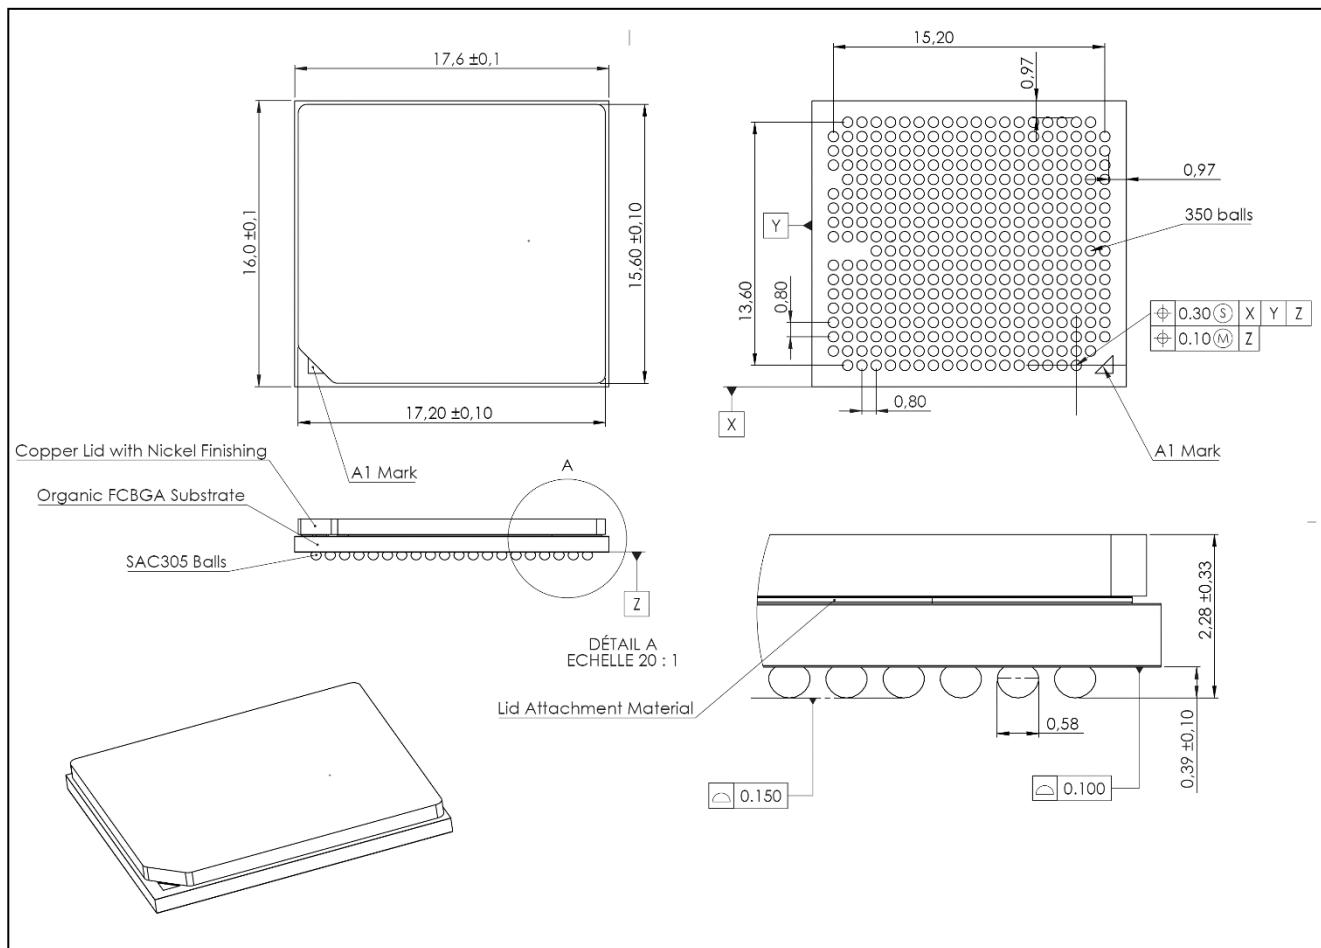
EV10AS940 BGA Package Outline. ⁽¹⁾
